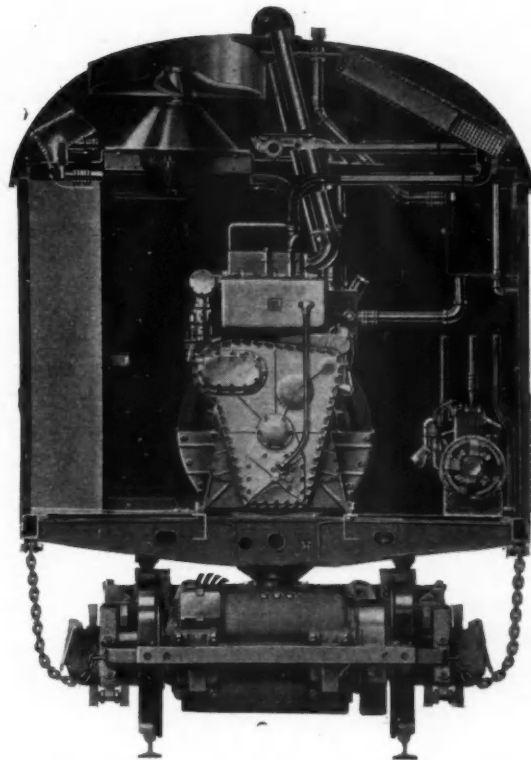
Transverse section of Brill rail car showing powerplant installation
